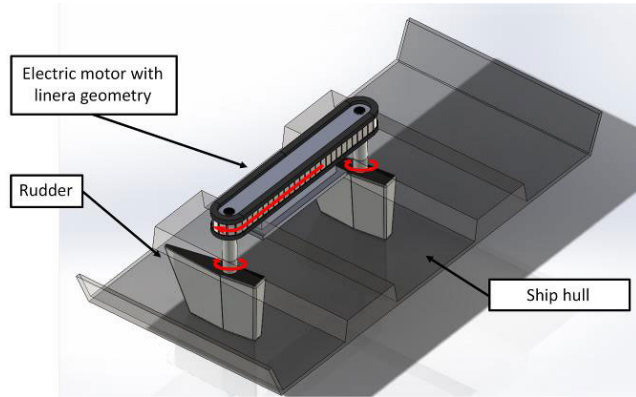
Application of the rotating motor with linear geometry as a ship rudder electric actuator.
